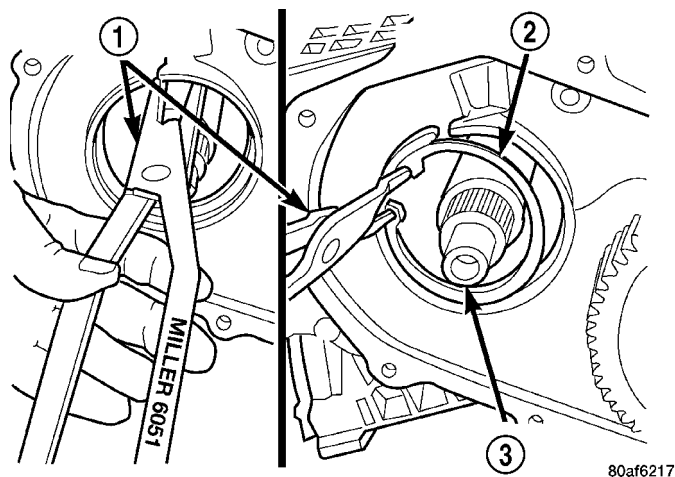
Remove Transfer Shaft Bearing Snap Ring
